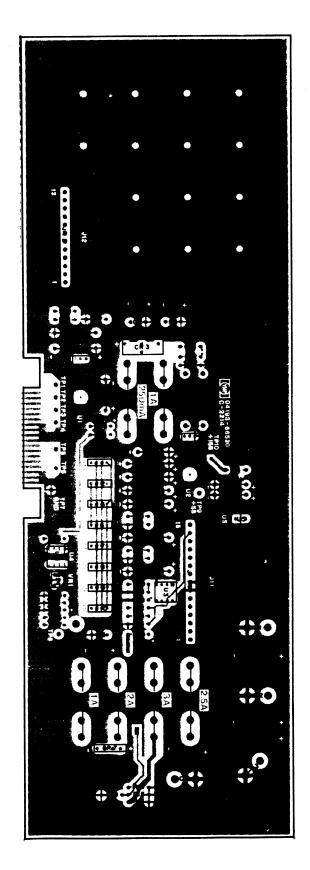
A20 Power Supply Board Assembly Component Locations.
